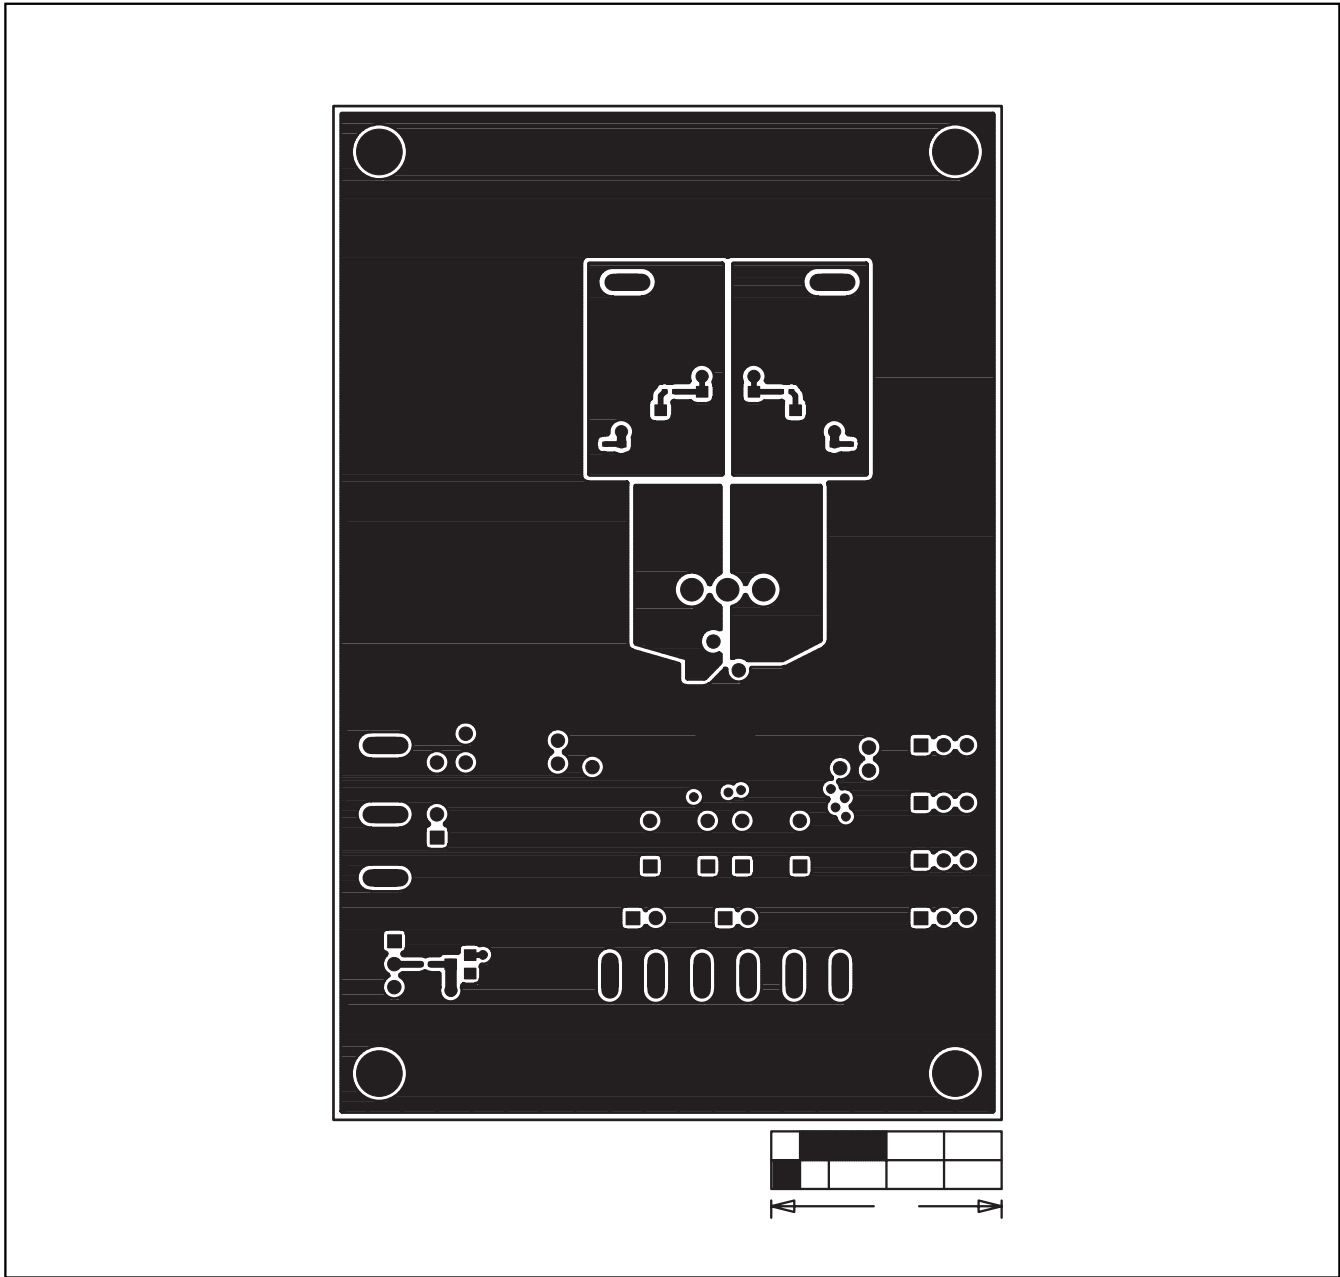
MAX9741 EV Kit PC Board Layout—Solder Side
